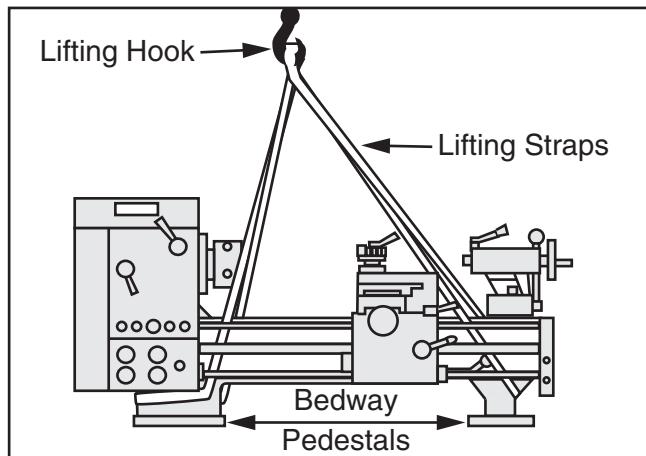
Lifting setup for a crane to keep straps from bending leadscrew and rods.
